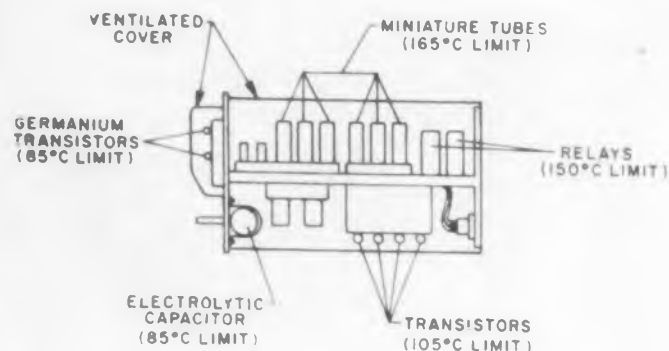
Example of equipment layout — side view of short 1/4 ATR unit with 33 w dissipated.
